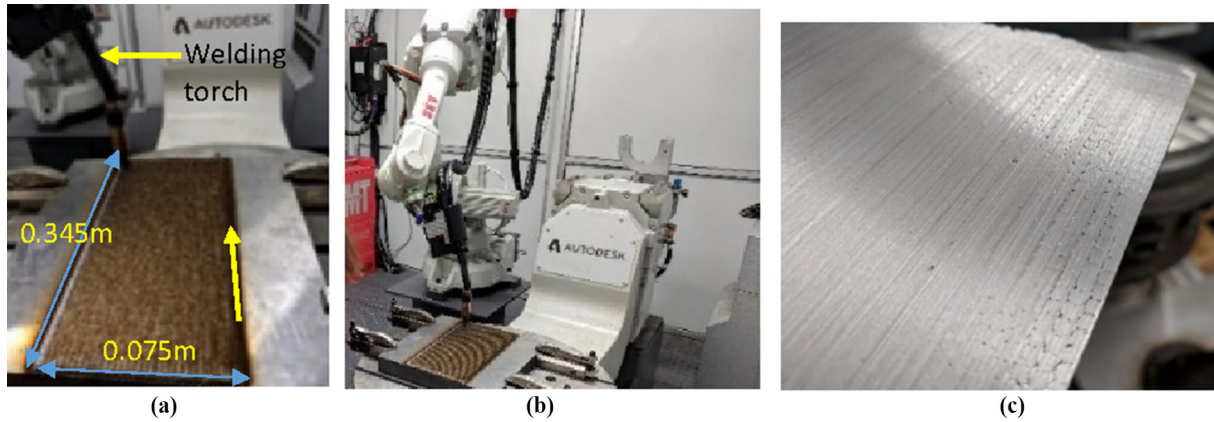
(a) WAAM printing process; (b) WAAM Printer and robot arm; (c) WAAM flat sheet component.
